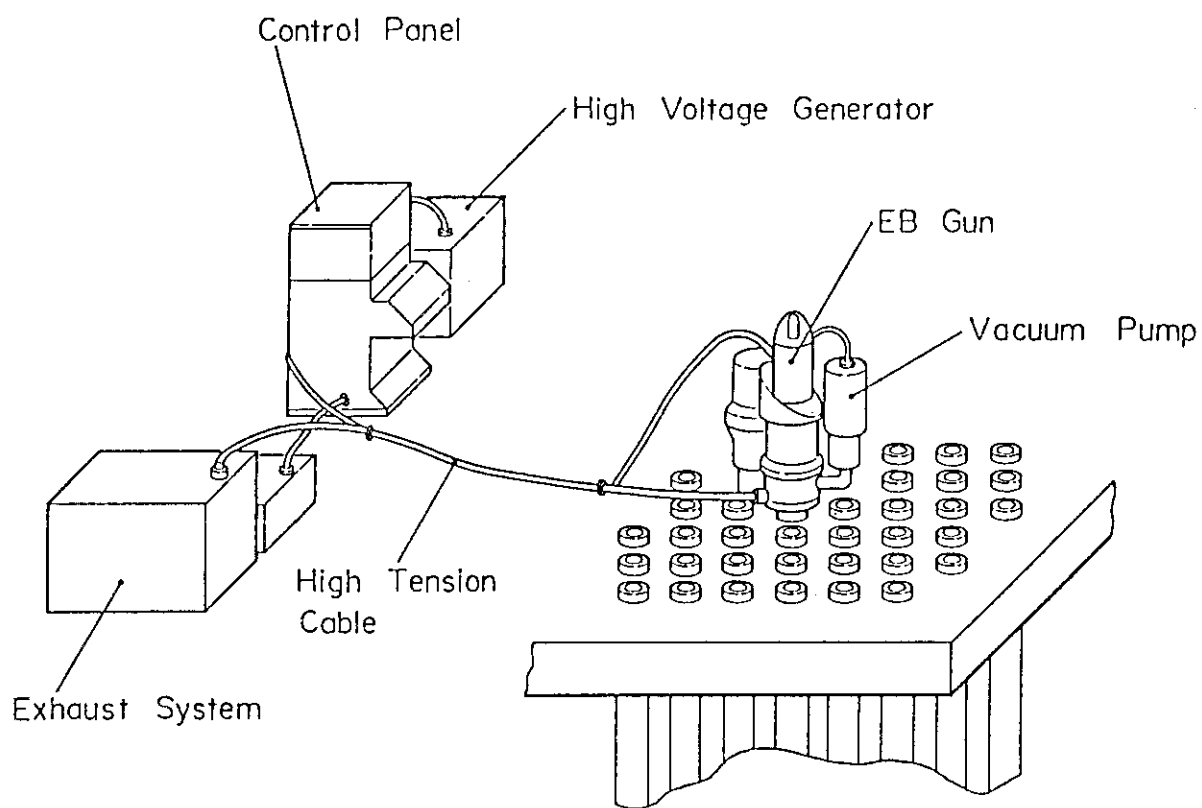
EBW equipment (Partial vacuum type)
